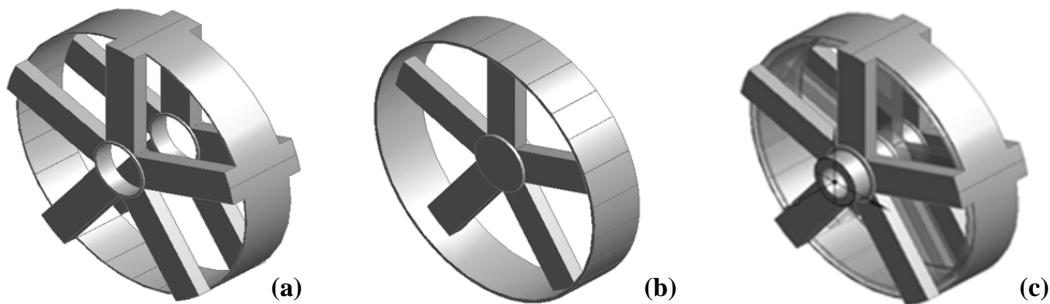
Generator support structures (a) Stator with spoke arm (b) Rotor with spoke arm (c) Complete assembly with shaft
